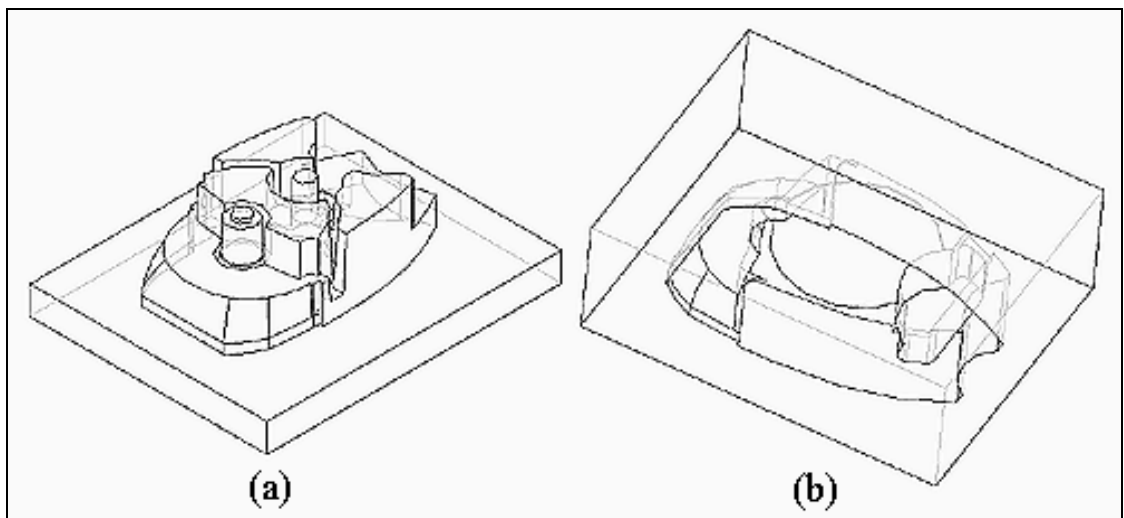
Motor housing cavity inserts (a) Ejector cavity insert (b) Cover cavity insert
